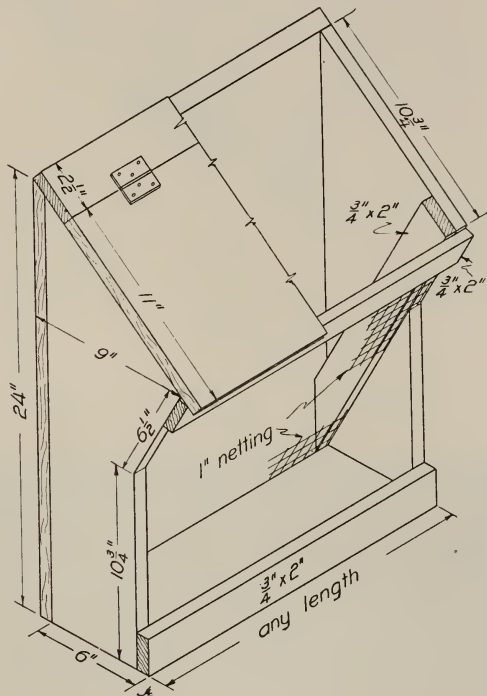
Plan for the construction of wall type green feed hopper shown in figure 87.
